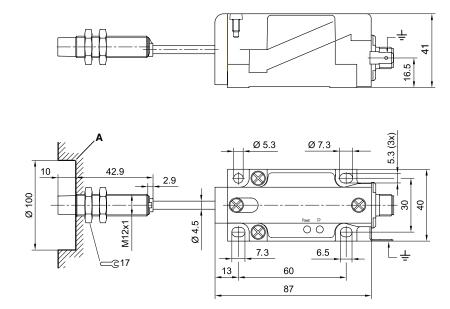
Processor BIS L-409-045-003-07-S4, dimensions in mm
